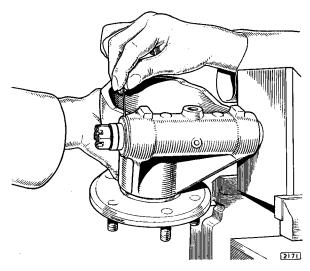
Measuring the amount of clearance between the hub carrier and large washer to determine the end float in the bearings.
